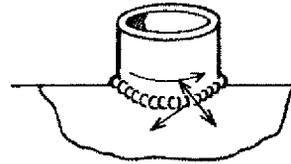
The edge weld has fewer paths than the lap weld, along which the heat can flow from the welded joint.
